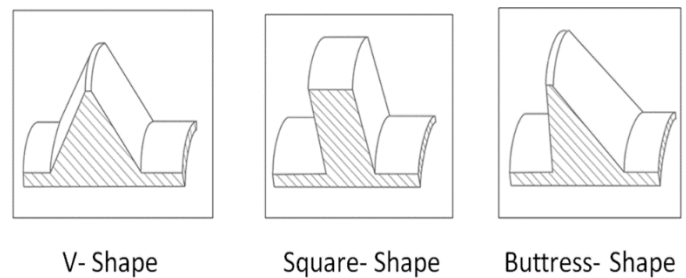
Thread designs: V-shaped, Square-shaped and Buttress-shaped.
